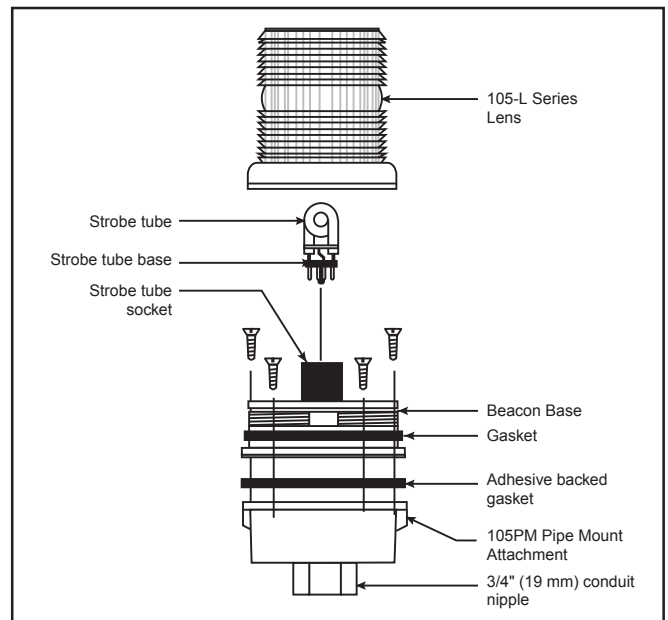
Securing the Beacon to the Mounting Attachment (Pipe Mount Attachment shown)
